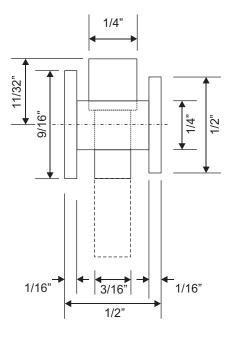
Stop Valve Body Method of fabrication Make central portion overlength to provide chucking piece.
